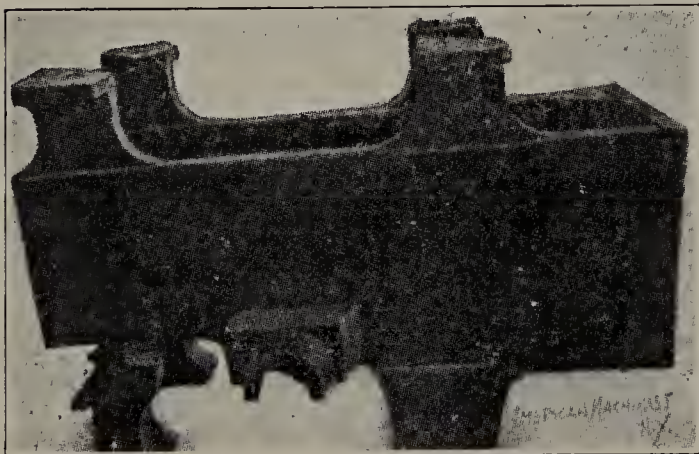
SAME CASTING AFTER CUTTING RISERS, SPRUES, ETC.
